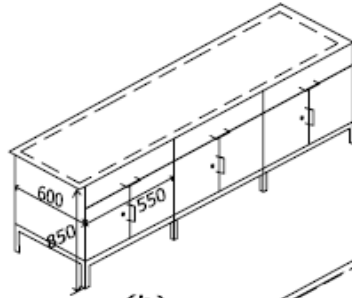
Fig. D Indicative drawing of MS Lab fixture for Food Microstructure Lab
